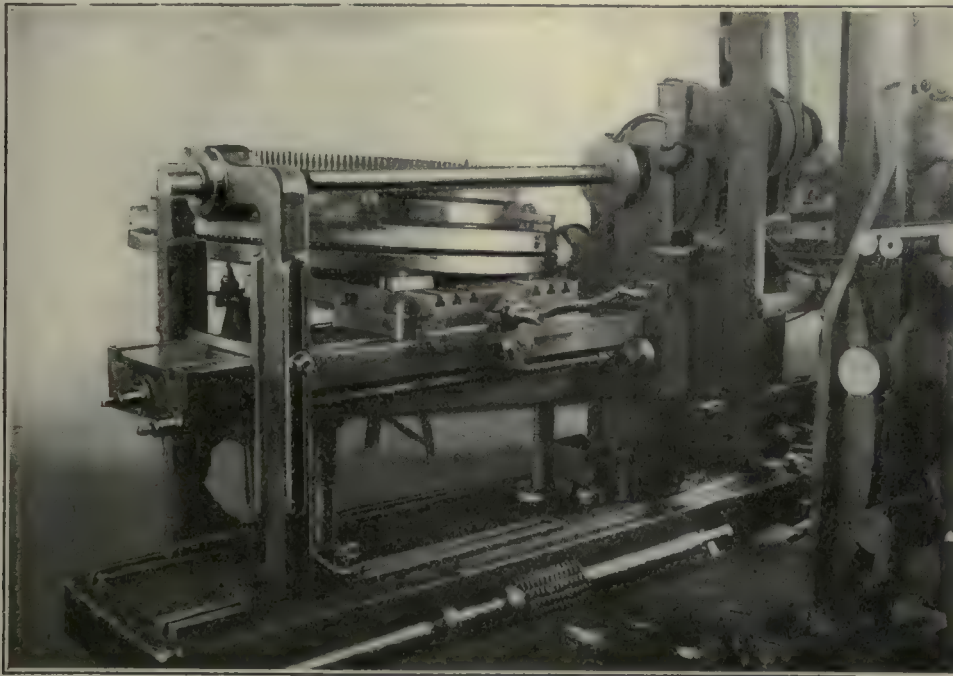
GASHING THE TEETH WITH A FLY CUTTER
